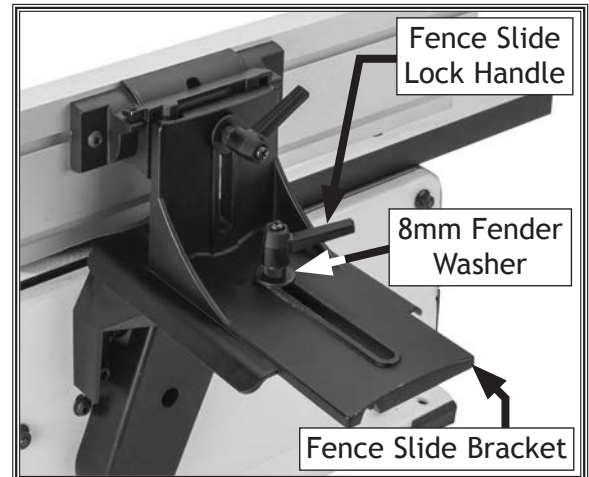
Fence slide lock handle and flat washer inserted in center of brackets.
